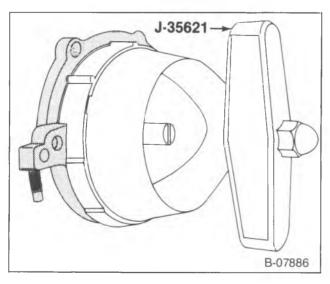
Installing the Rear Crankshaft Oil Seal (5.0L and 5.7L Engines)
